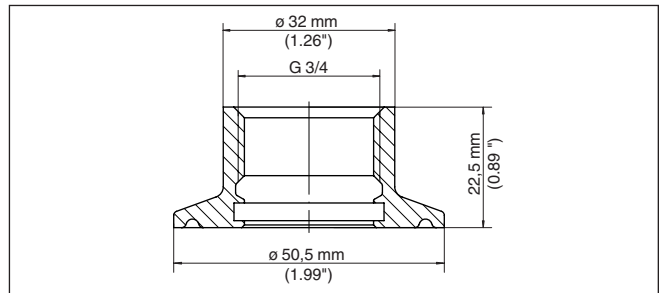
Dimensions of threaded adapter G $\frac{3}{4}$ (DIN 3852-X) on Clamp 1 $\frac{1}{2}$ " (DIN 32676, ISO 2852) PN 16
